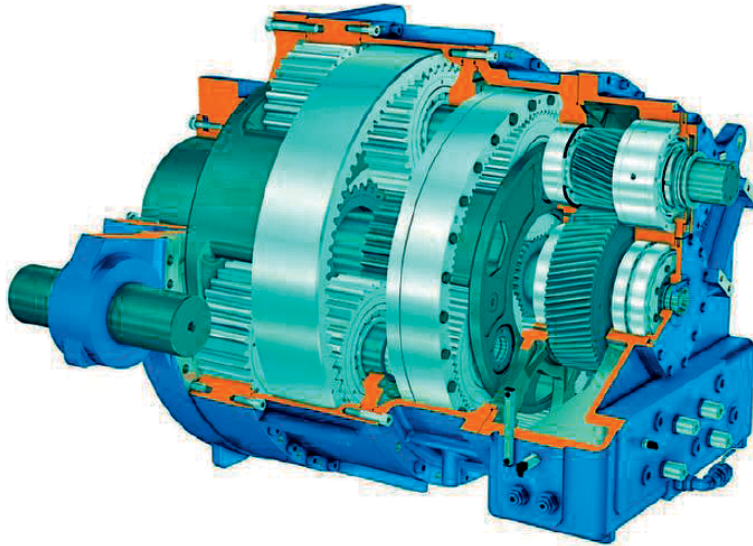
Scheme of a three-stage gearbox: planetary-planetary-parallel [18].
